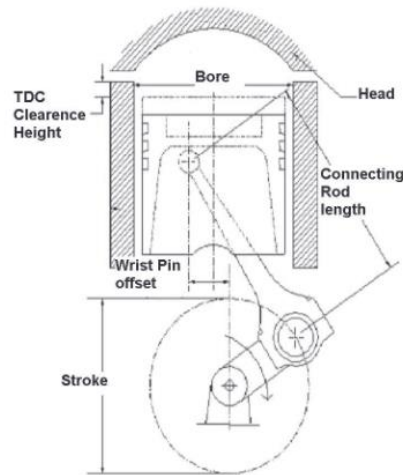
Engine cylinder schematic showing the setup of the engine cylinder part in GT-SUITE [330]
